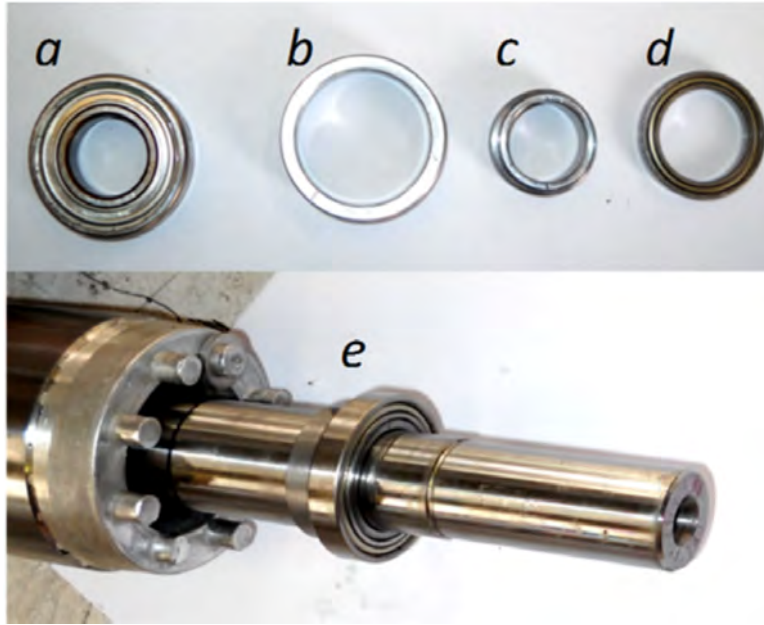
Rotor of the eccentric motor unit. Top, from left to right: a) original bearing, b) external and c) internal eccentric rings, and d) new bearing. Bottom: e) mounted unit on the shaft.
